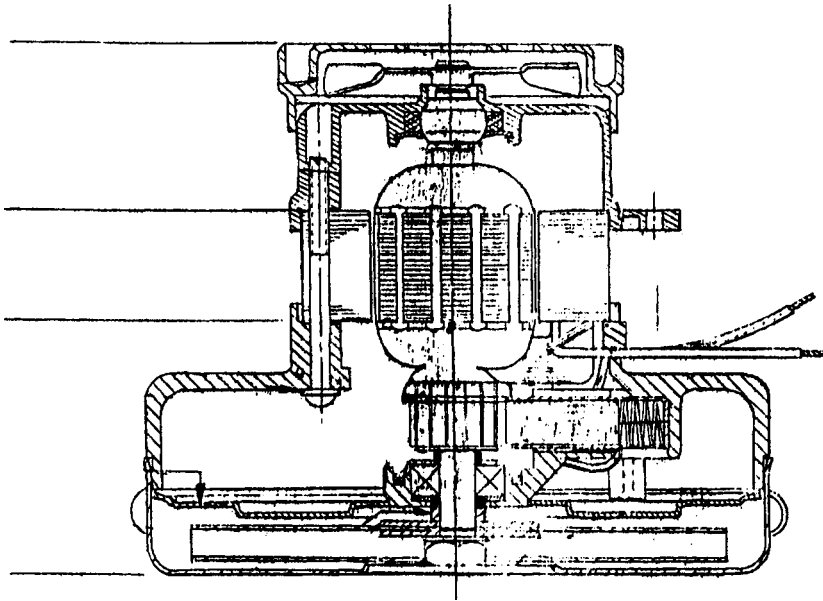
Sketch of a shop-type vacuum cleaner motor with armature supported by a ball bearing.
